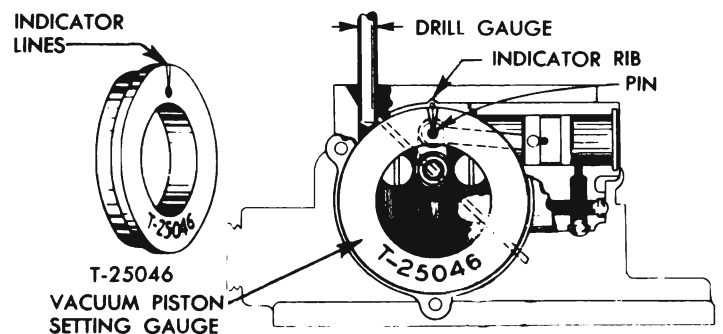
Setting Vacuum Piston with Gauge T-25046
